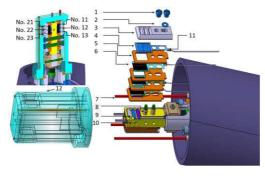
Sectional and exploded isometric decomposition views of the W7-X multi-channel RFA probe head, which contains 1, screw; 2, gasket; 3, orifice plate; 4, thin entrance slit plate; 5, ceramic spacer plate; 6, grid; 7, Langmuir probe; 8, nut; 9, collector; 10, ceramic base; 11, grid-style holes; 12, boron nitride cover, and the channel number named as No. 11, 12, 13 in one side and No. 21, 22, and 23 in the other side.
